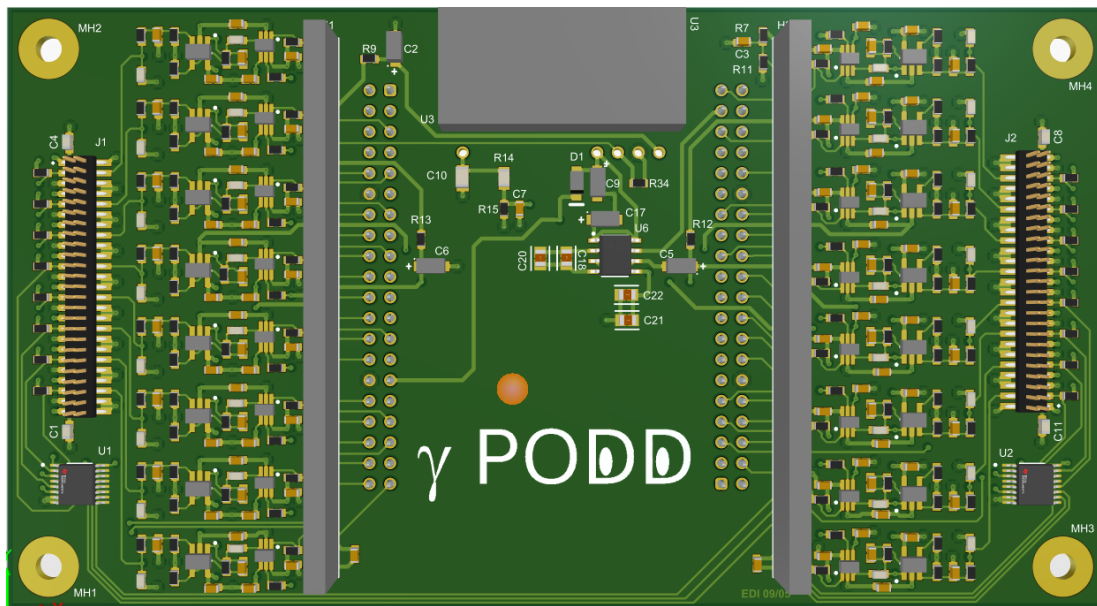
The analog front-end PCB (5.3×2.9 inches) with 16 parallel ToT channels arranged symmetrically around the central power supply section. Ribbon cable connectors (J1, J2) interface with the detector array, while board-to-board headers connect to the FPGA below and microcontroller above.
